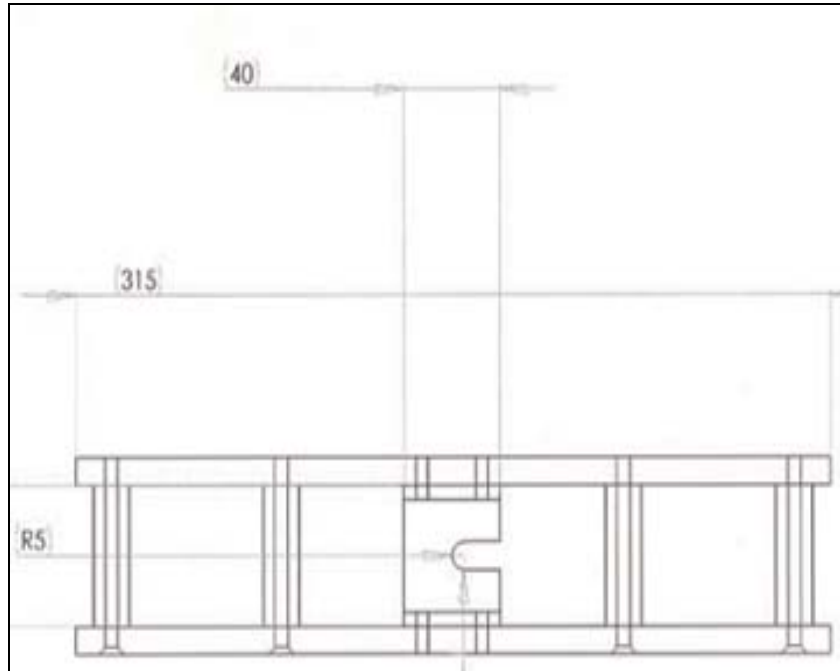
SolidWorks® drawing of a burst chamber: side view.
